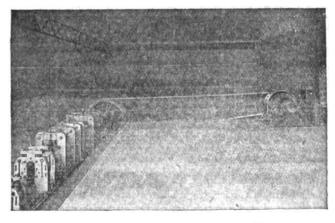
Rolling Mill with 350-h.p. Witton Motor Drive.
